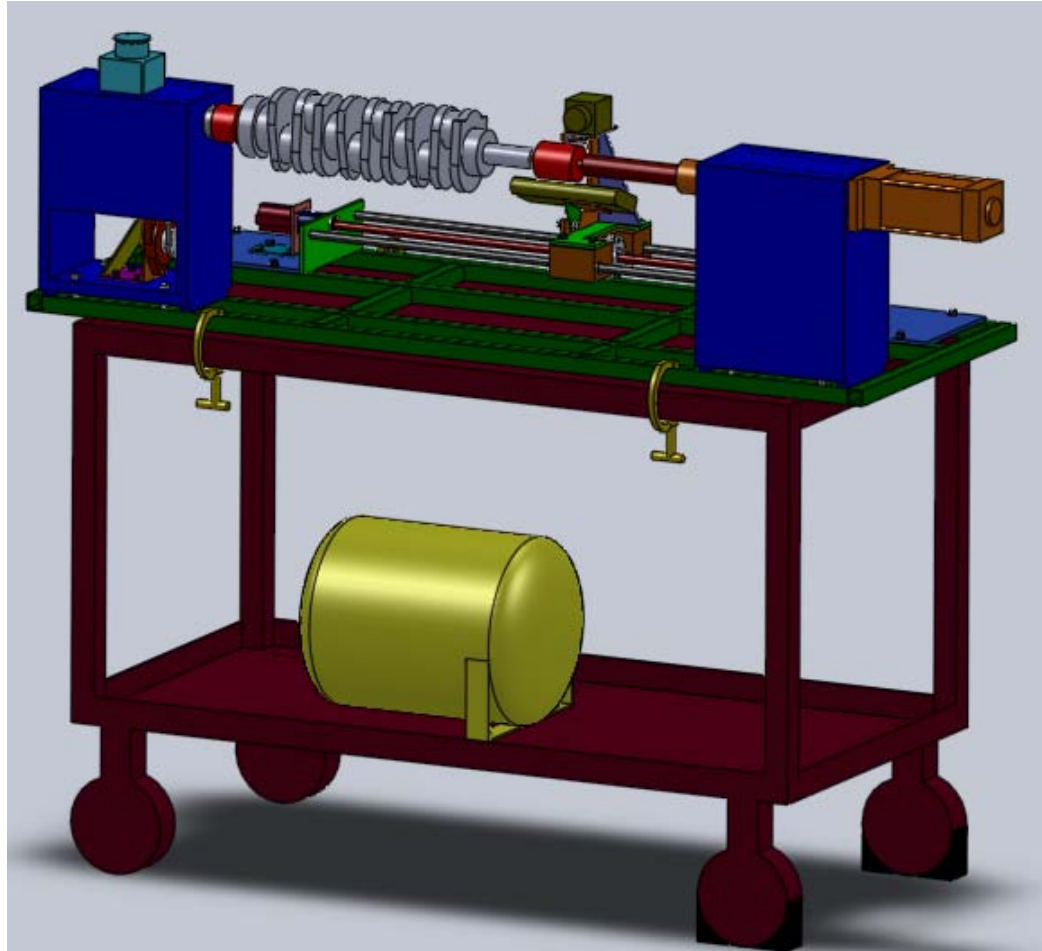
Entire Assembly showing the Mechanism mounted to a portable cart with air supply tank and emergency stop button attached.
